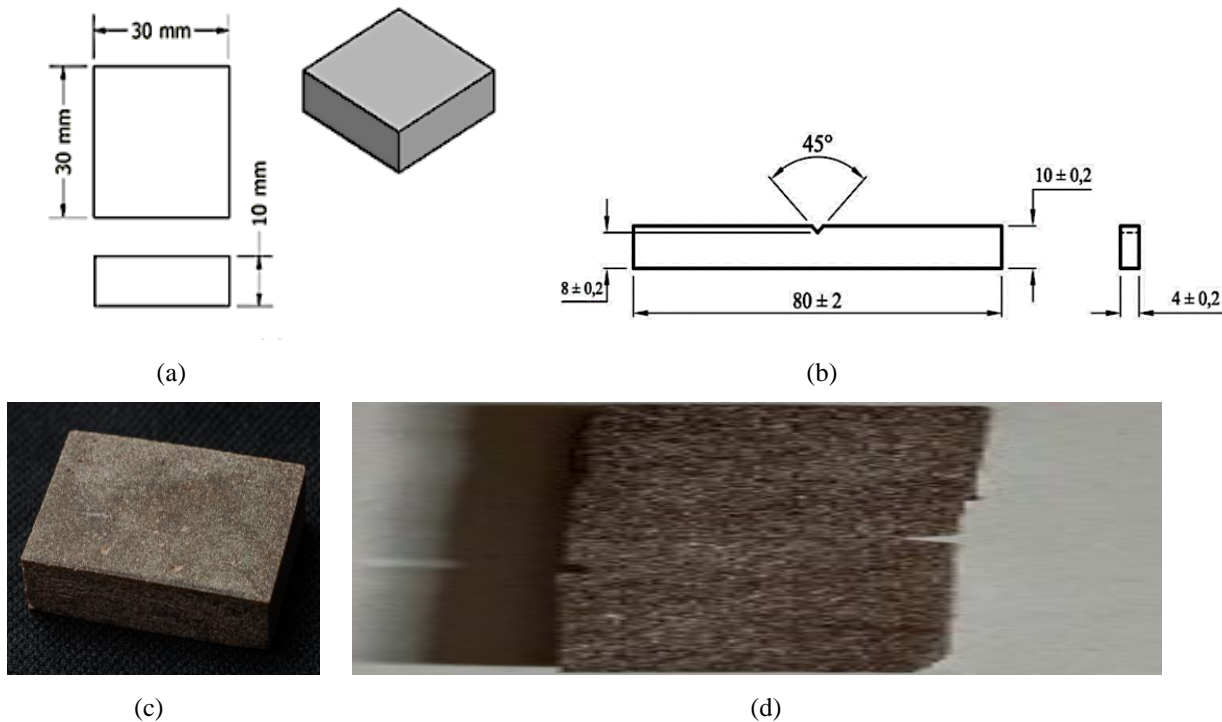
Dimensions and physical appearances of the experimental test specimens: (a) schematic dimensions for the Ogoshi wear and hardness tests, (b) schematic dimensions for the Charpy impact test, (c) fabricated specimen for the Ogoshi wear and hardness tests, and (d) fabricated specimen for the Charpy impact test
